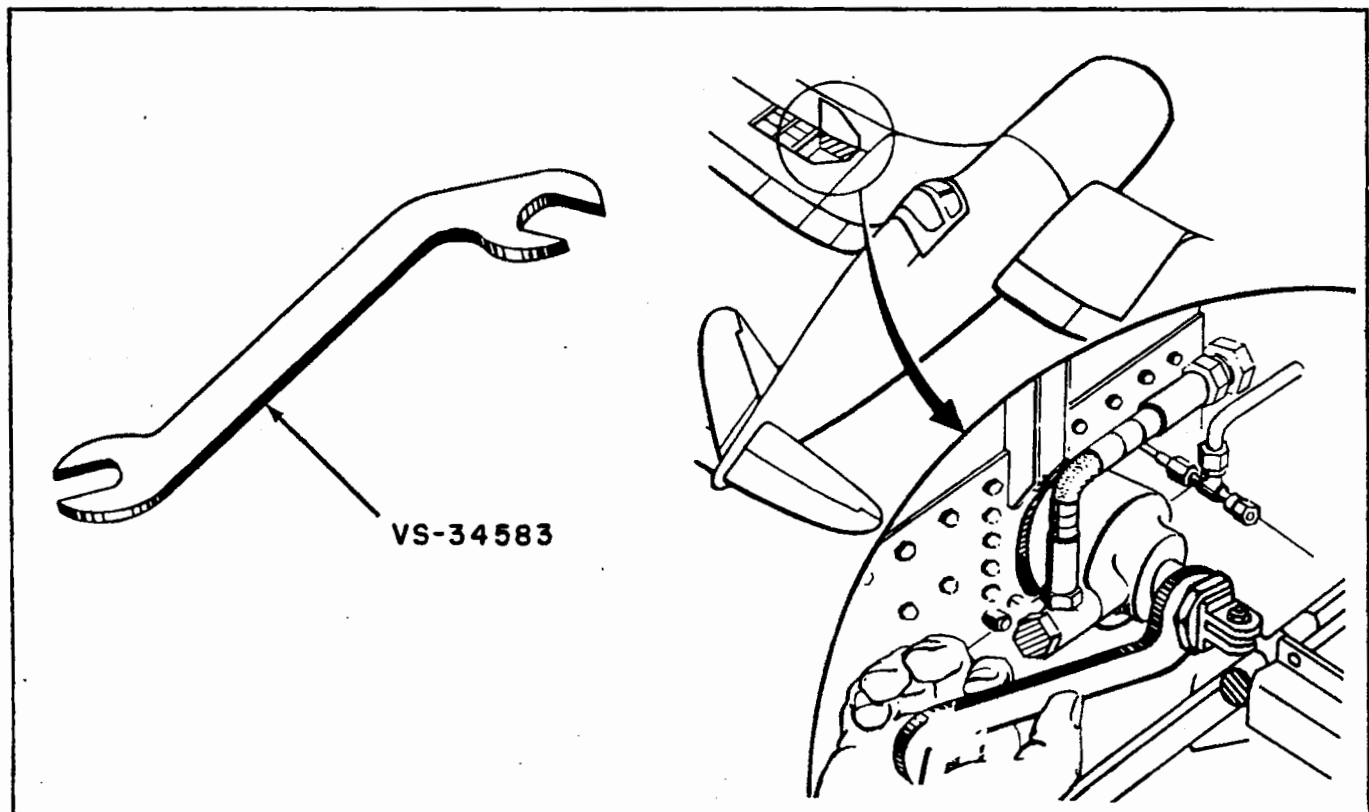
Wrench — Used for Adjustment of Piston Rod on Wing Fold Cylinder.
